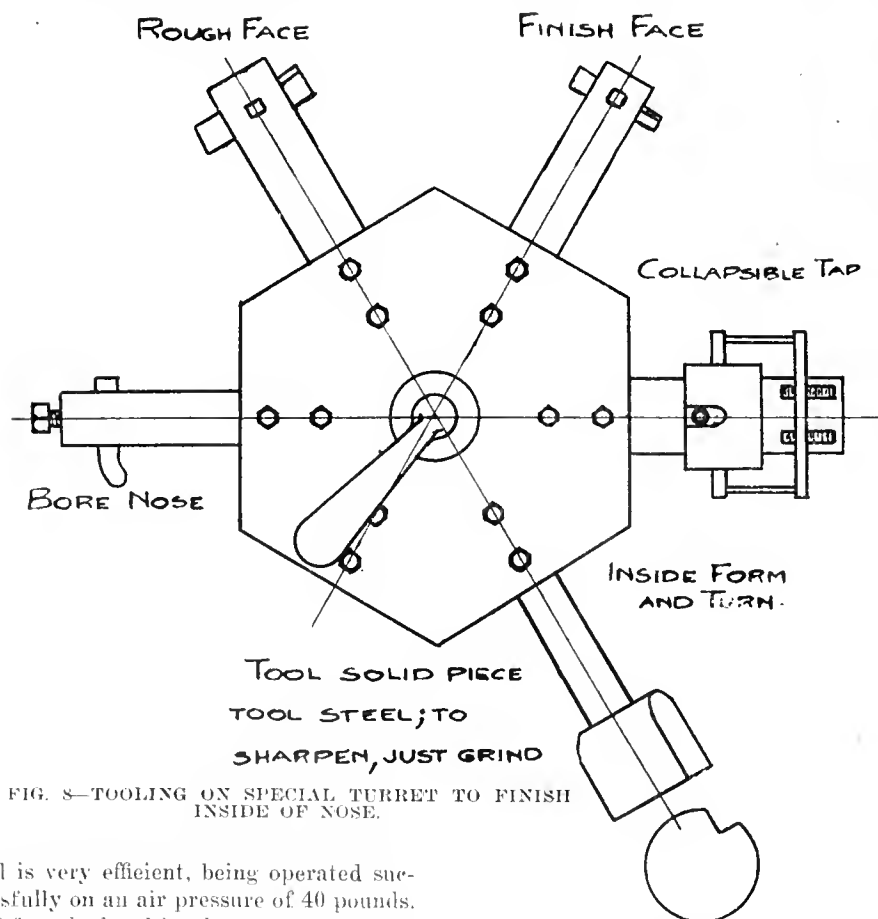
TOOLING ON SPECIAL TURRET TO FINISH INSIDE OF NOSE.
